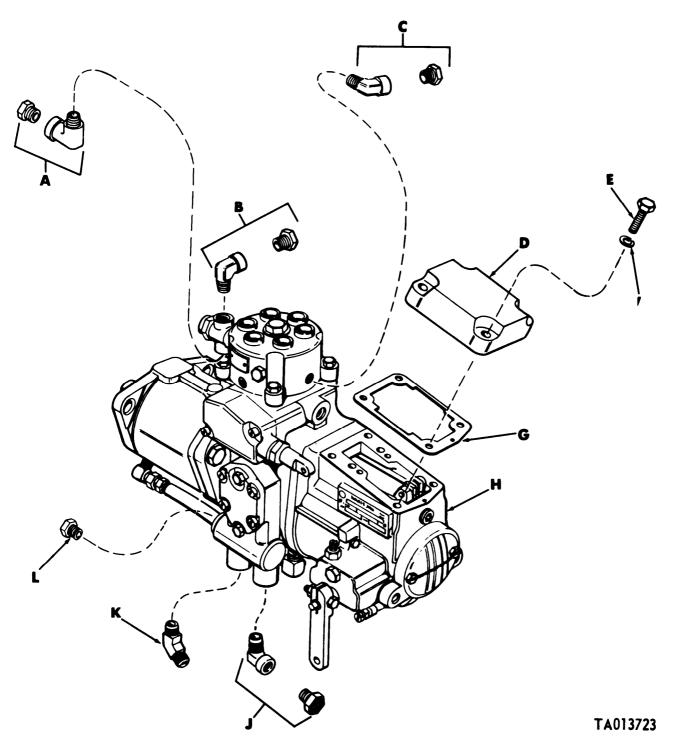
Early code F fuel injection pump assembly, partial exploded view.
